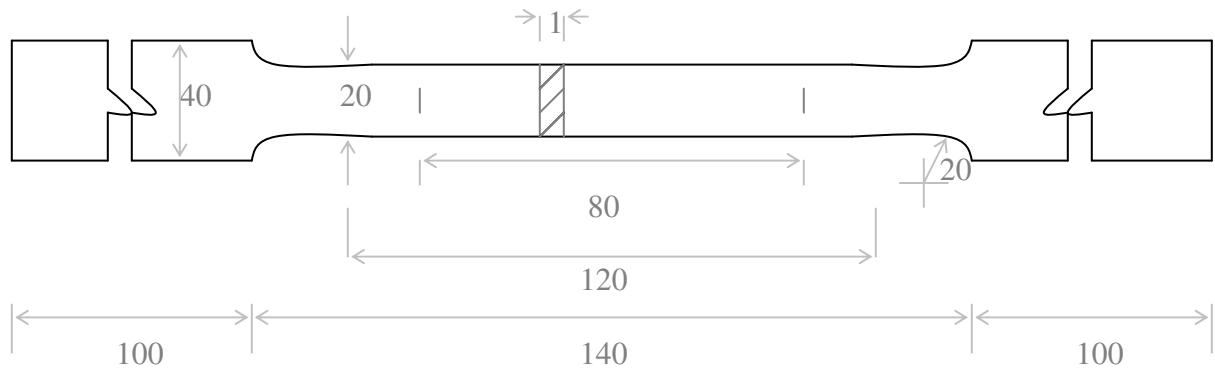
Geometrical Shape and dimensions of the test pieces all dimensions in millimeter.
